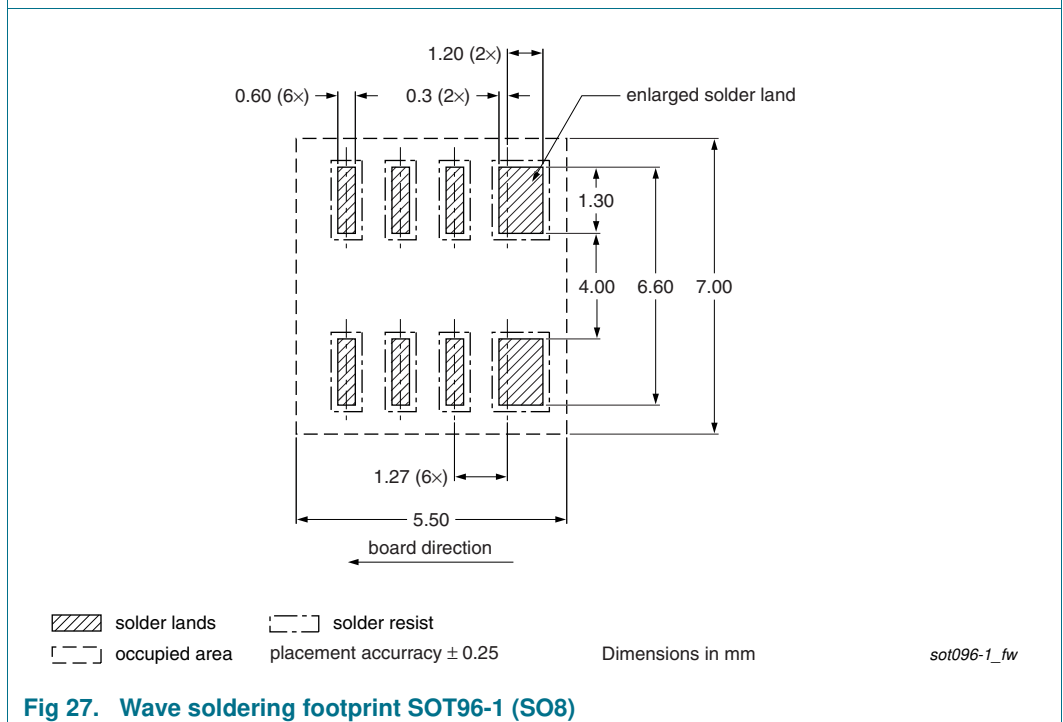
Wave soldering footprint SOT96-1 (SO8)
